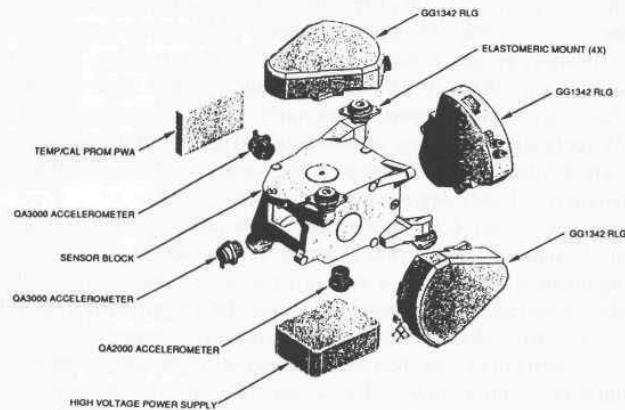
Exploded view of the *Inertial Sensor Assembly (ISA)* showing the relative orientations of the three ring-laser gyros and accelerometers (courtesy Honeywell, Inc., Military Avionics Division).
